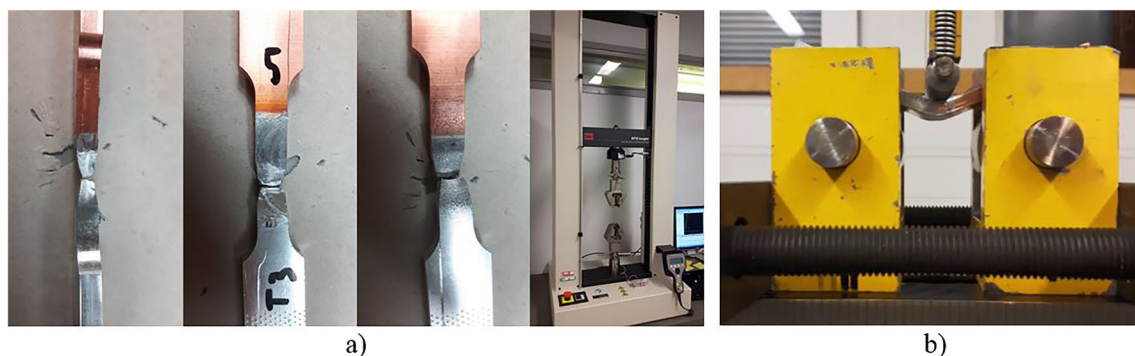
Mechanical testing of the welded Al-Cu specimens: (a) three specimens tested for tensile strength with fracture surface outside of the original joint line interface; (b) bending test operation
